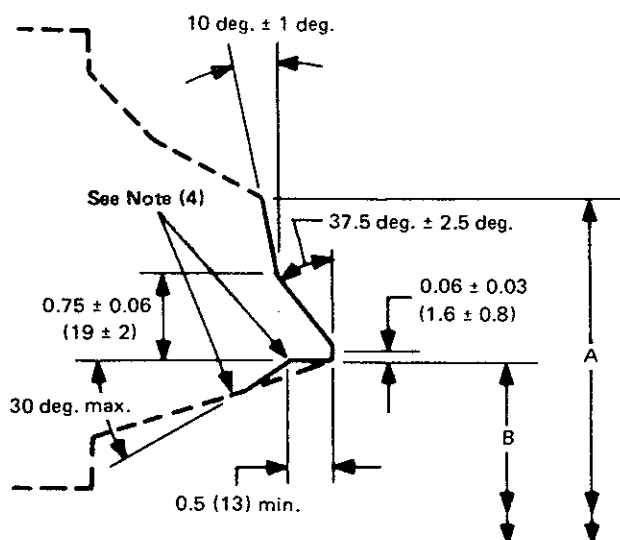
(5) Welding End Detail for Joint Using Split Rectangular Backing Ring.
